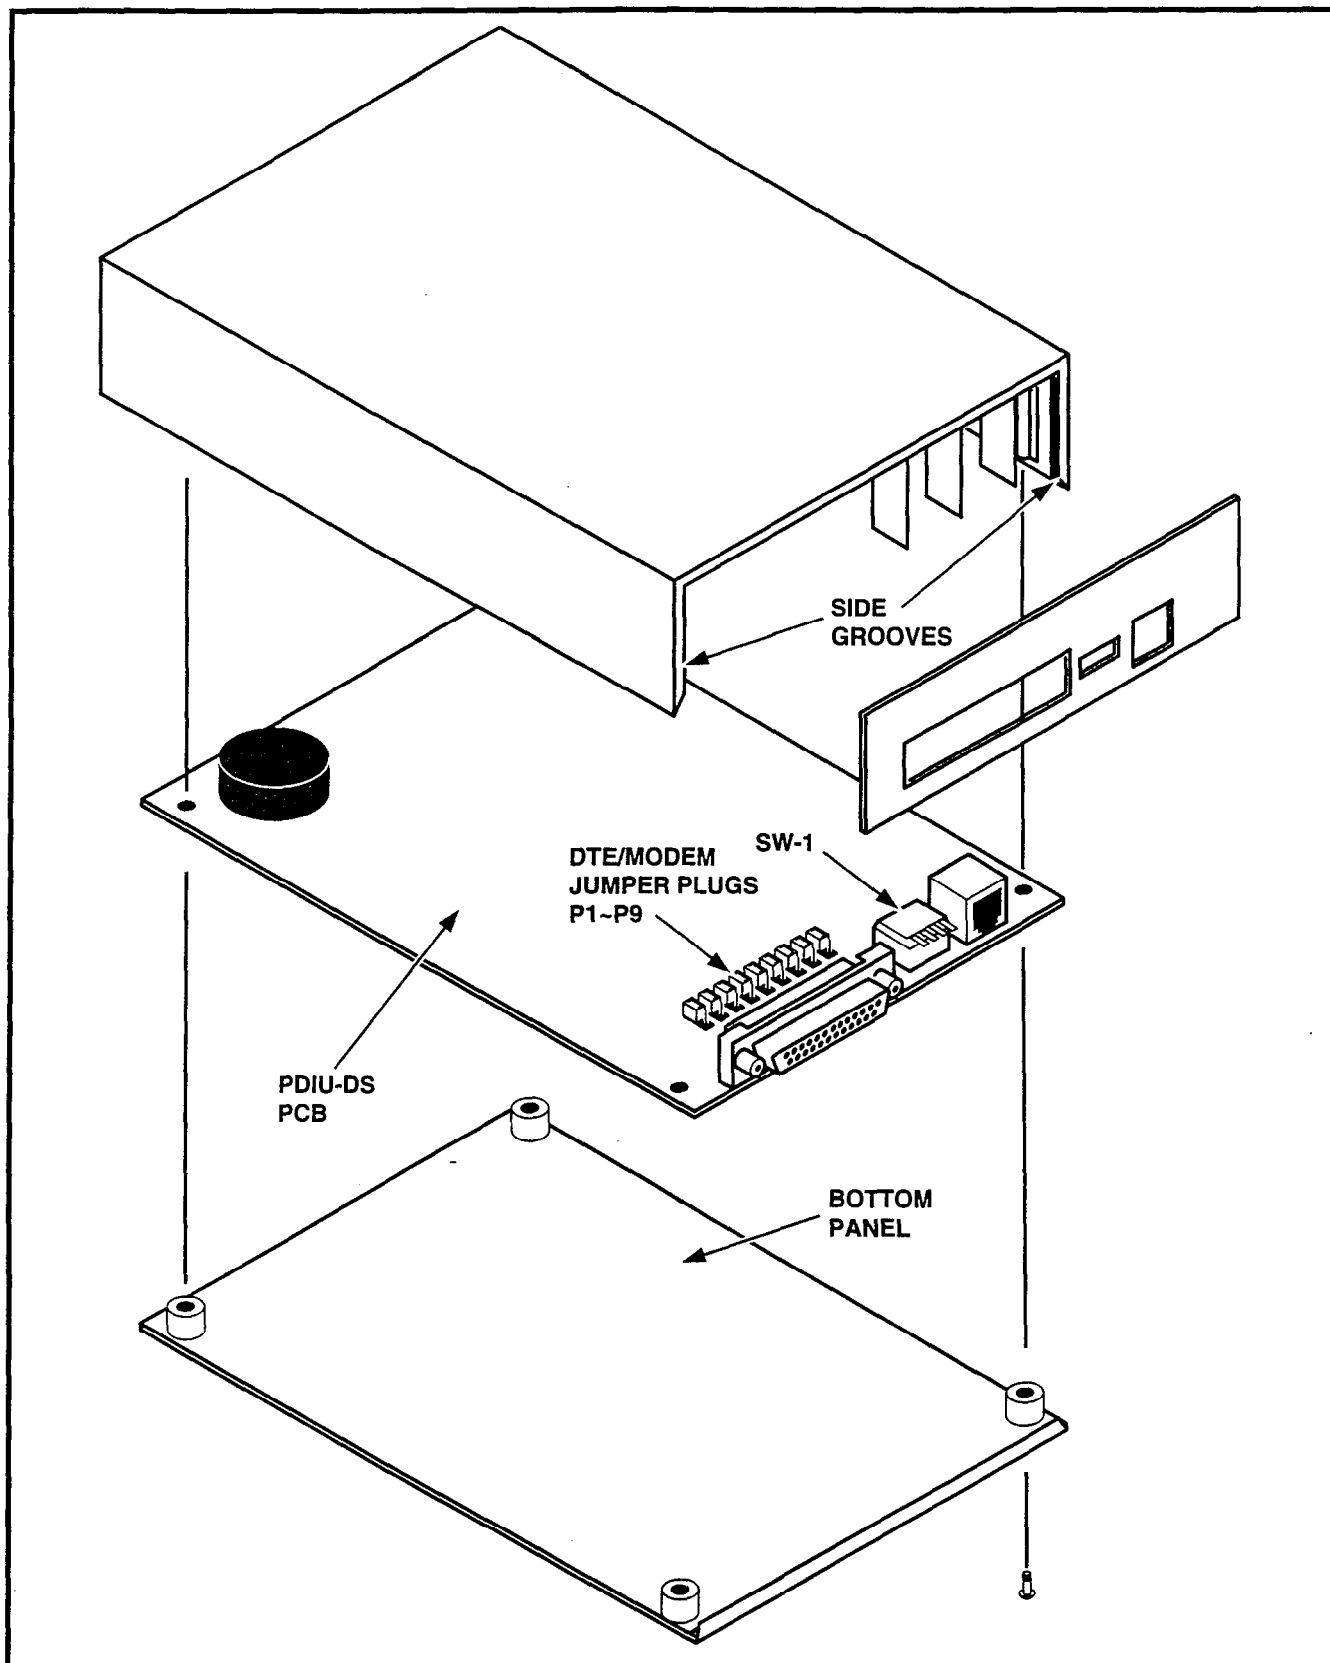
PDIU-DS DISASSEMBLY/ASSEMBLY DIAGRAM
